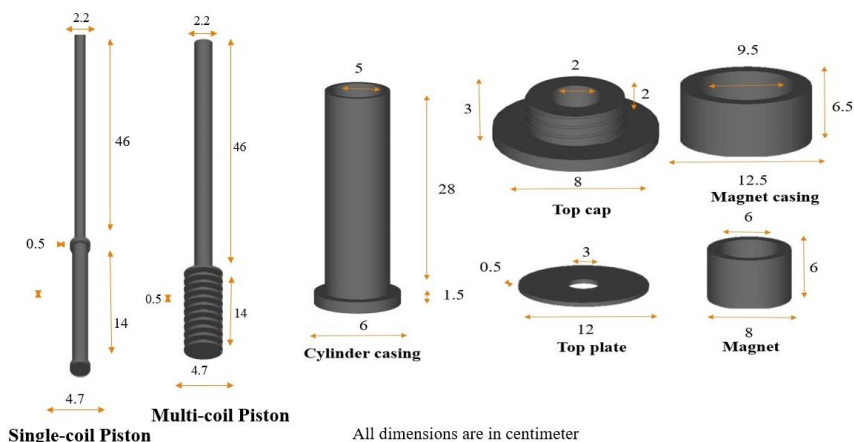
Dimensions detailing of self-power single and multi-coil MR Damper
